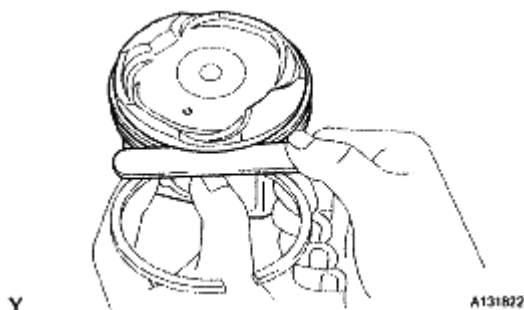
Measuring Clearance Between Piston Ring & Wall Of Ring Groove Using Feeler Gauge
